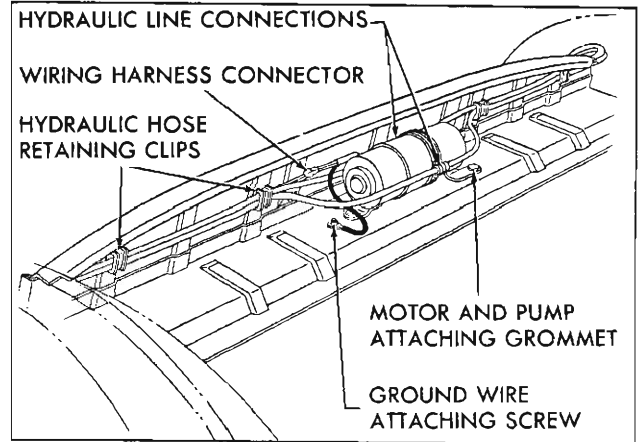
Hydro-Lectric Motor and Pump Installed (A-B Style Shown)
